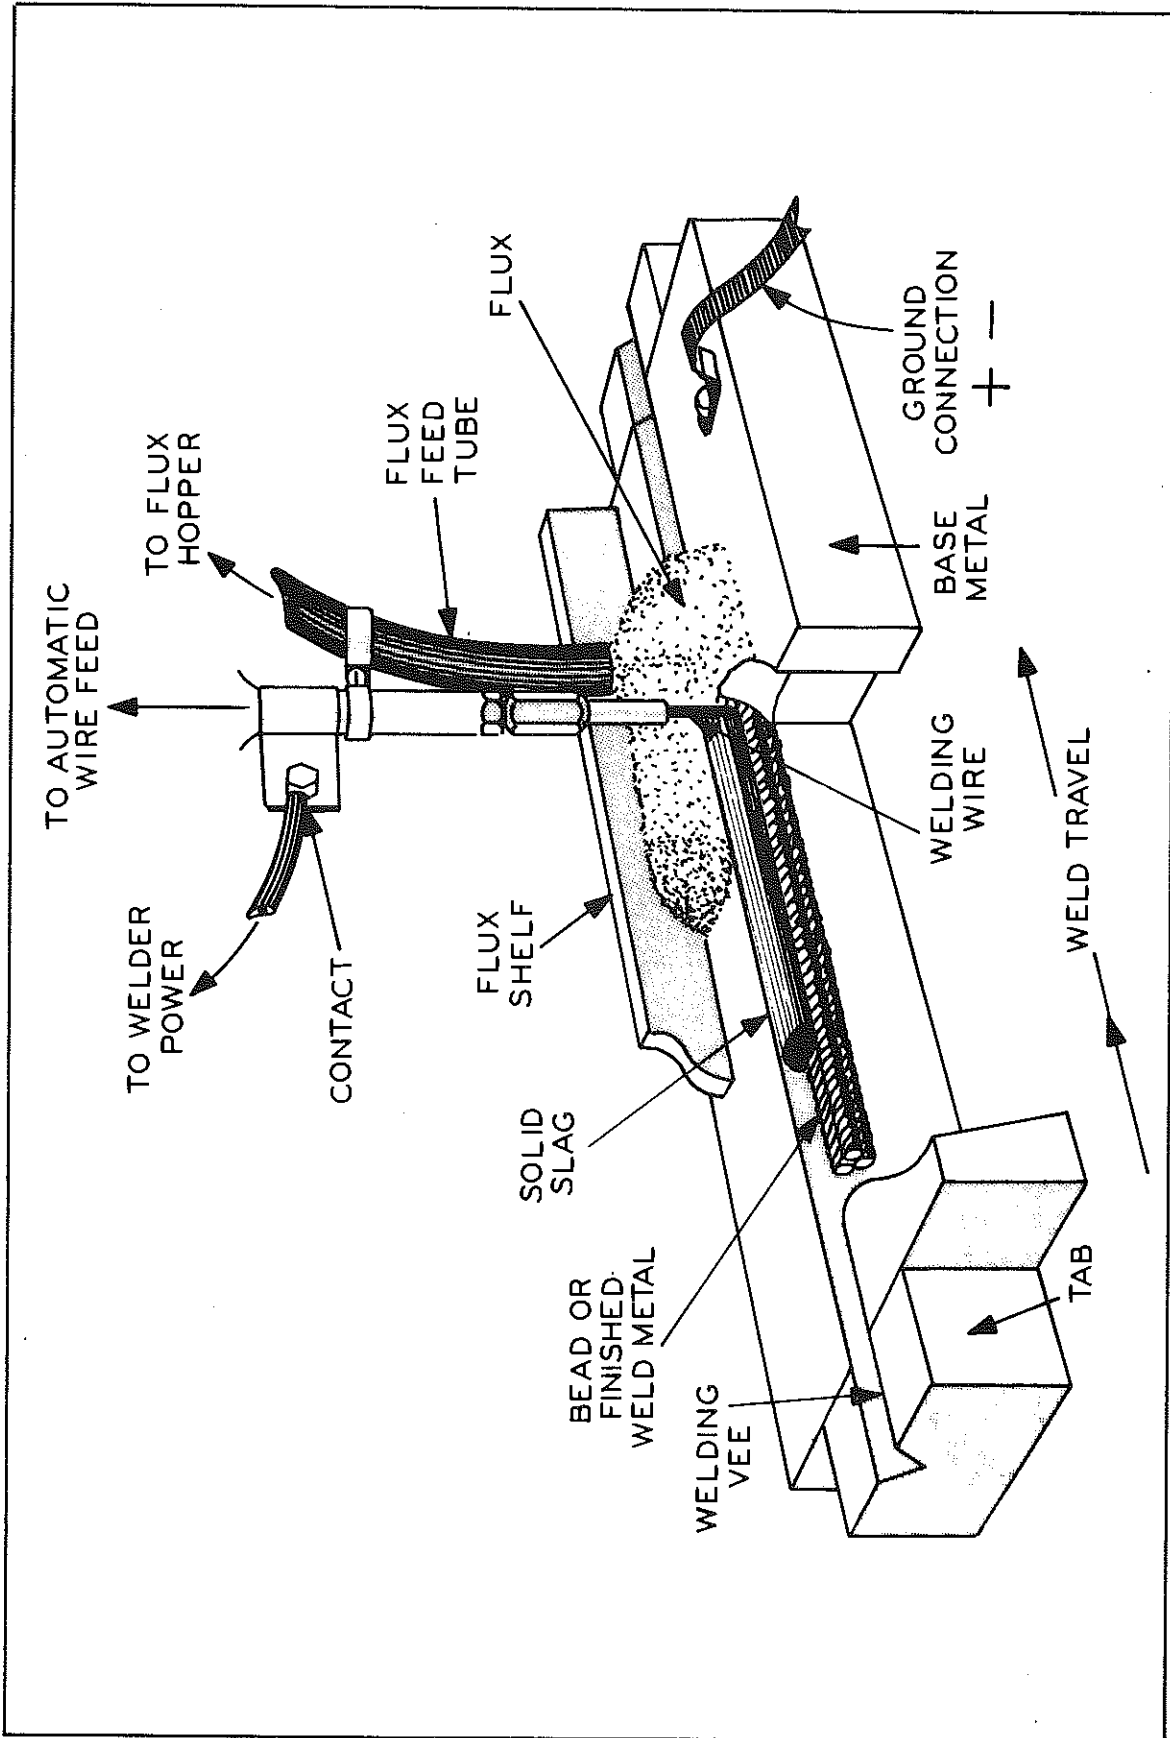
Cutaway view of multiple pass butt welding by the submerged arc welding process.
